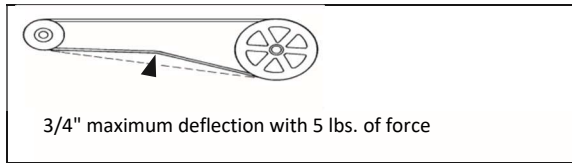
BLOWER AND MOTOR DRIVE
